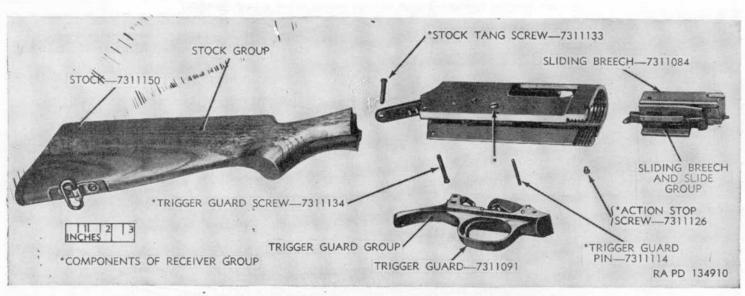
Breech end of Stevens shotgun M520-30-partially exploded view.
